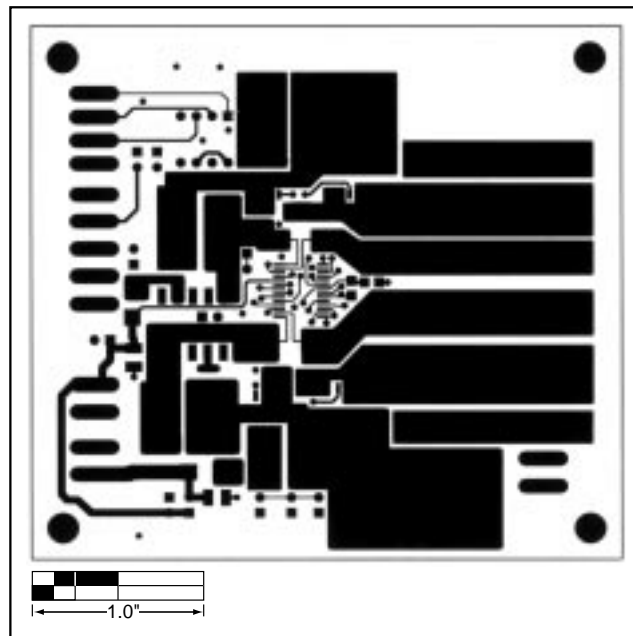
MAX1630/MAX1631/MAX1632 EV Kit PC Board Layout—Component Side
